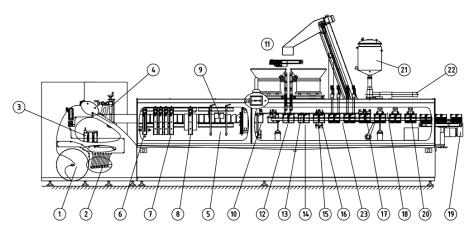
Technological machine for packing pastes in packages "doypack", authors': 1-roll of film, 2-mechanism of unwrapping, 3-puncher, 4-forming triangle, 5- guides, 6- soldering iron of bottom with a drive, 7-mechanism of vertical welding, 8-mechanism of cooling, 9- corner stamps, 10- cutting mechanism (scissors), 11- a mechanism of cork supplying, 12- soldering iron of corks, 13-top stretcher with tweezers, 14-lower stretcher with tweezers, 15-top suckers, 16-bottom suckers, 17-mechanism of package stretching, 18-horizontal soldering iron , 19- conveyor, 20-cooling mechanism, 21-bunker with a product, 22-dispenser drive, 23-dispensers (4 pieces) with drive
